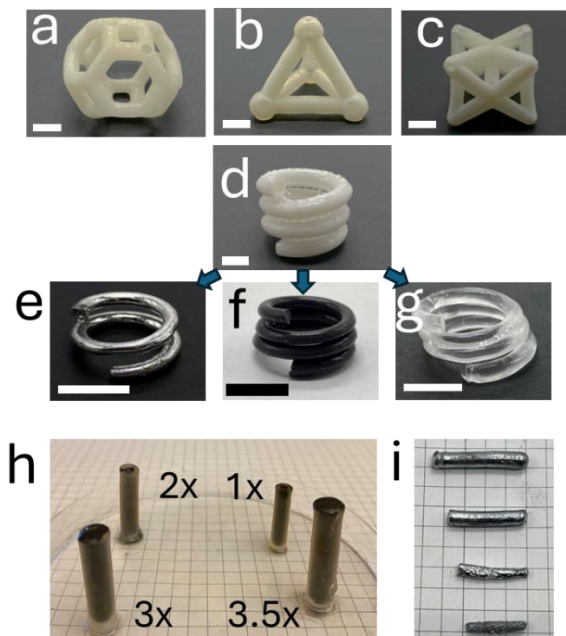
Images of (a) Truncated octahedral mold. (b) Tetrahedral mold. (c) Octahedral mold. (d) Spring mold. (e)-(f) Material casting through the spring mold. (e) Field's metal. (f) Iron particle/PDMS (1:1 weight ratio). (g) PDMS. (h) Adaptive mold with different-sized expansion. (i) Gallium casting through the adaptive mold in (h).
